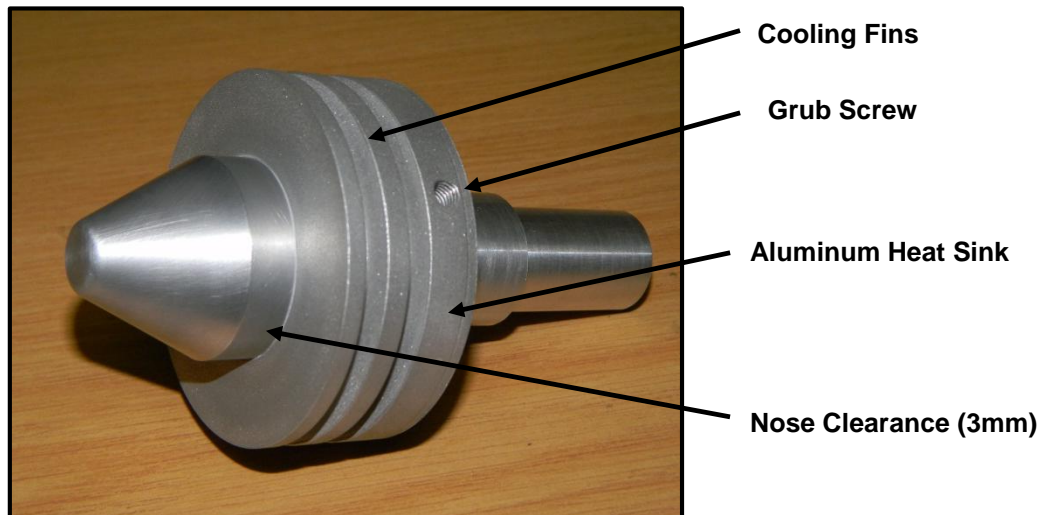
Non Consumable, Removable Aluminium Heat Sink
